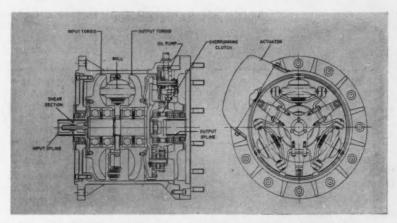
Lycoming mechanical traction constant-speed drive. Two adjacent flywheel members, called toroids, are concentric about the drive axis. Adjacent surfaces of toroids are dished to form a toroidal space. Rolls mounted in yokes fastened to a fixed cage within the toroidal space contact each toroid. Power is transmitted from one toroid to the other through friction because the rolls are easily steered from one roll angle to another to vary the speed ratio. Automatic speed controls adjust the roll position to maintain constant output
